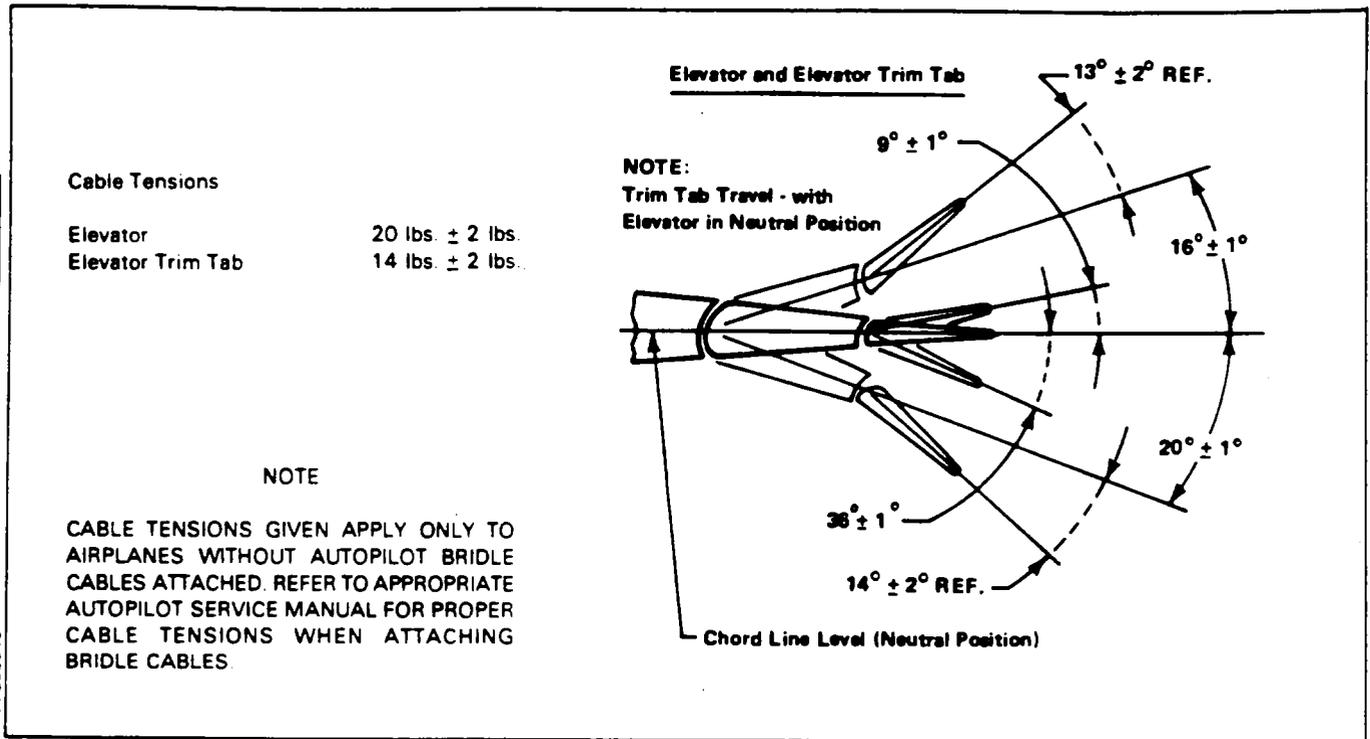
Elevator and Elevator Trim - Travels and Cable Tensions
